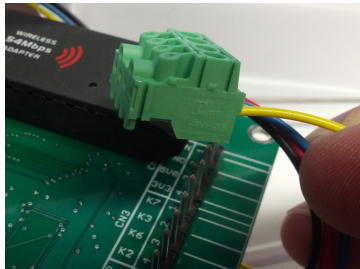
The controller board has 36 connections for 3.5 mm spacing removable wire-to-board screw terminals.
